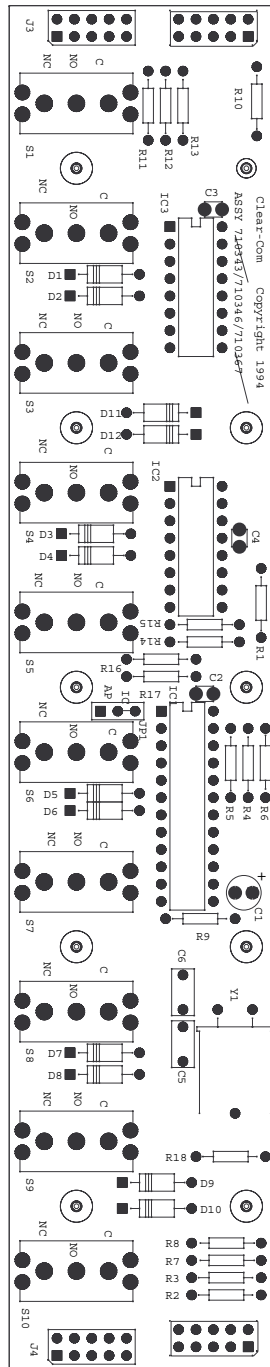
Assembly drawing—ICS-52/52T Selector Switch PCB Rev. C
